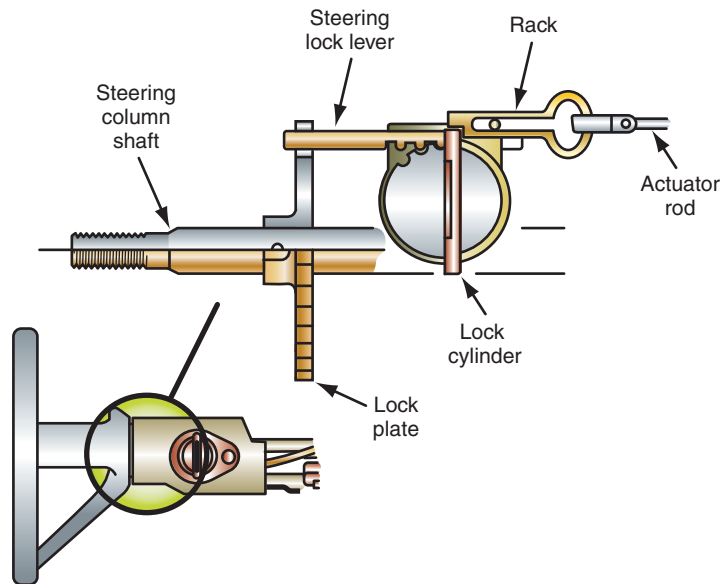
Mechanical linkage used to prevent starting the engine while the transmission is in gear.
